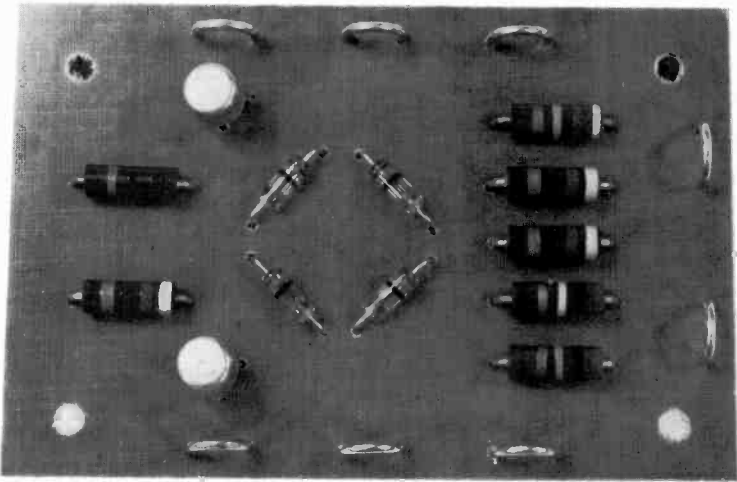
Completed circuit board for the enlarger exposure meter.
